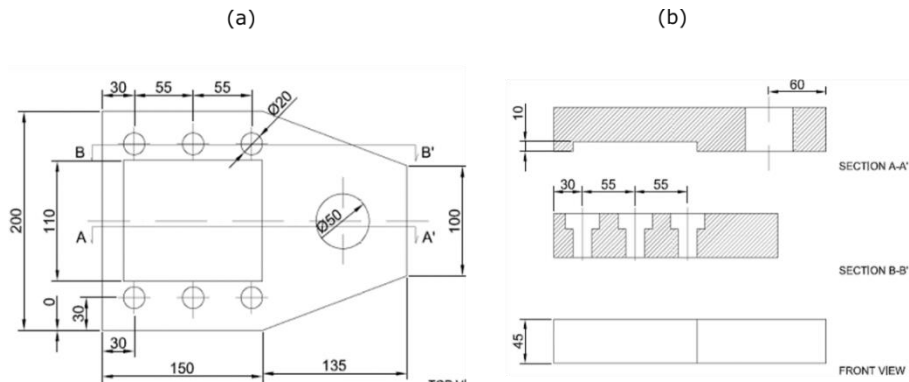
(a) Dimensions of the steel clamp and (b) sections of the clamp.
